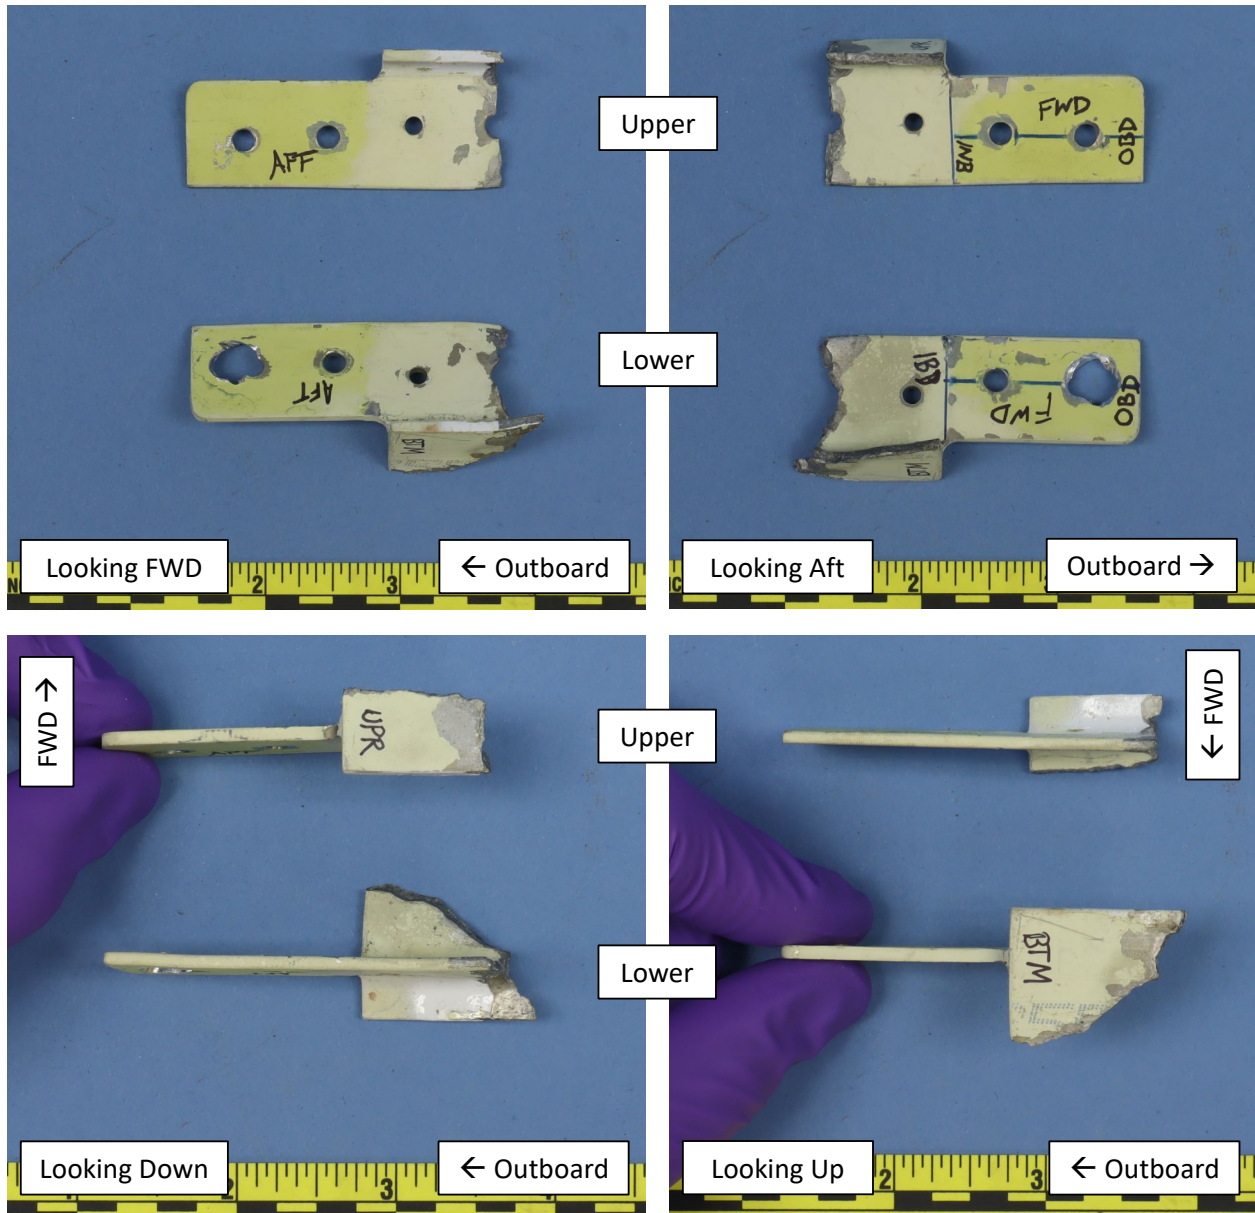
Photographs of the fractured main spar caps (outboard fracture location) after disassembly from the winglet attachment rib, main spar web, and TACS hinge support brackets.
